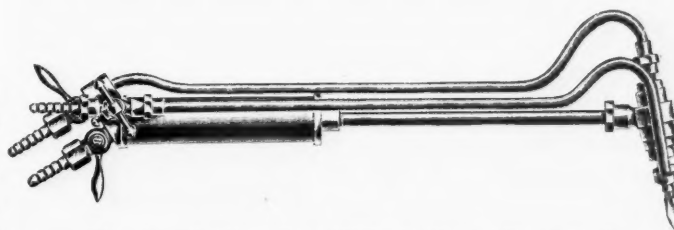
Welding Tool With Cutting Attachment.
